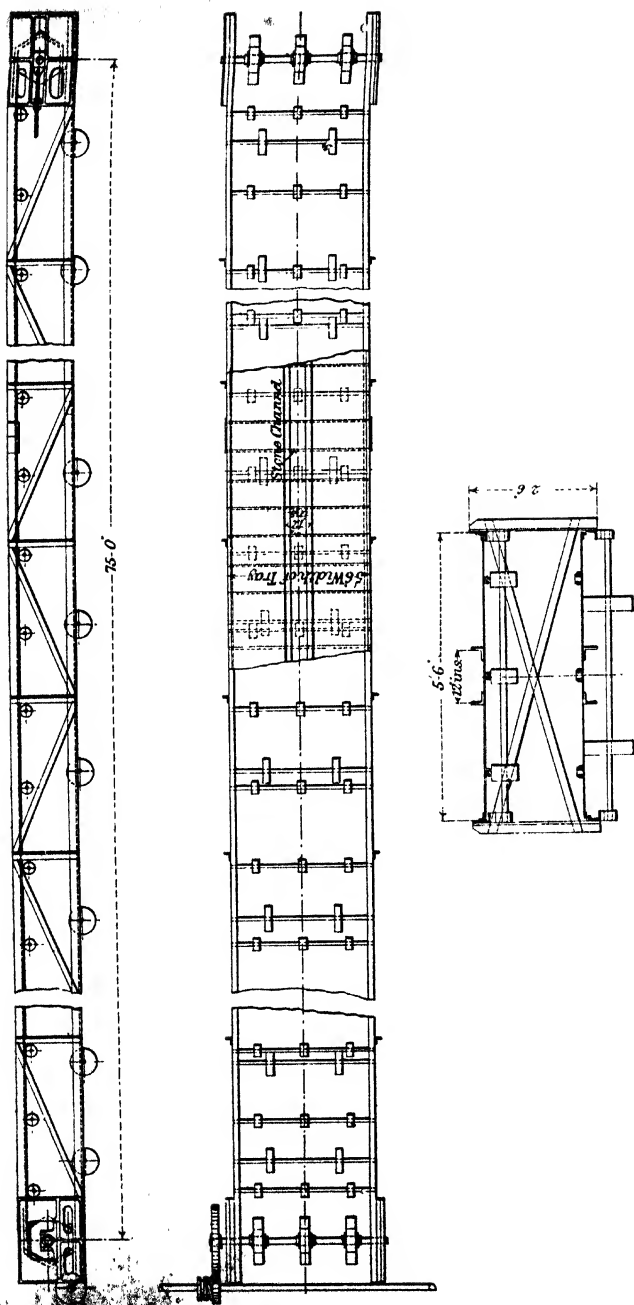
Picking-belt with central compartment for stone. Plan, side and end elevations.
